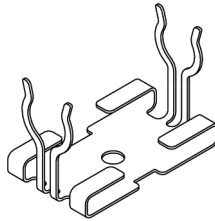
Mounting Clip (Secured with an M4 Screw or Cable Tie)
